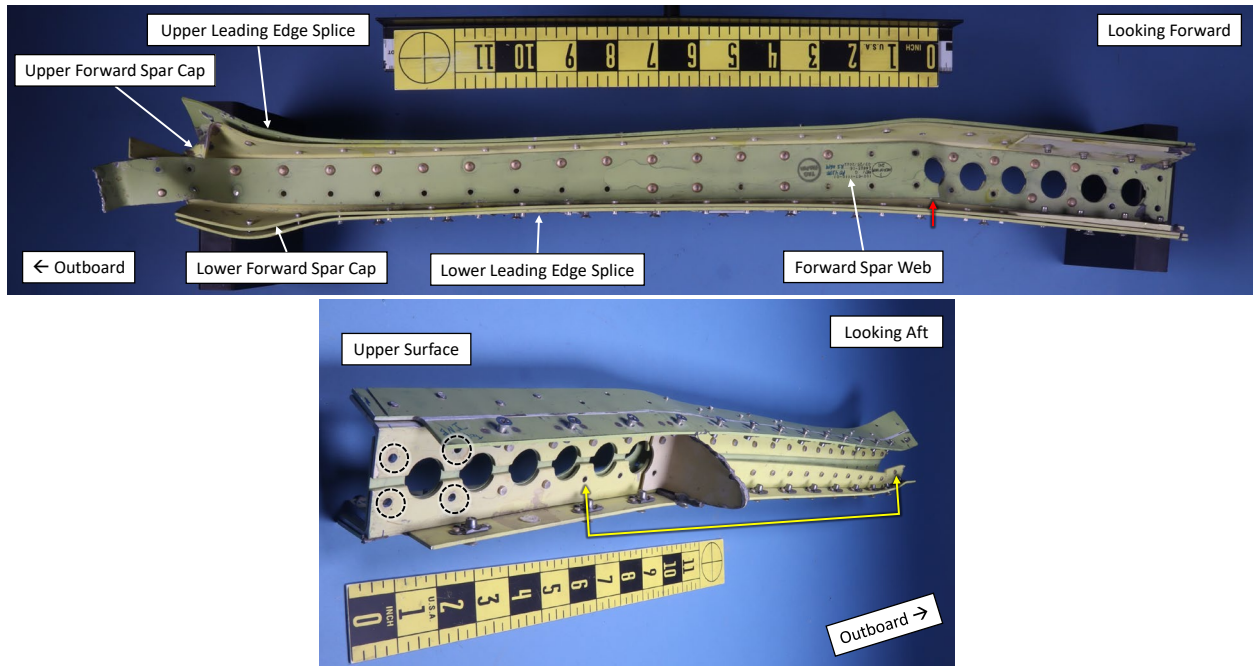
Photographs of the aft side (upper) and forward side (lower) of the wing extension forward spar and leading edge splice joints with the leading edge component removed. The red arrow in the upper image indicates a fracture on the lower side of the forward spar web where localized buckling of the web and upper cap/leading edge splice was observed. The lower image shows fastener separation of the outboard end of the lower forward spar cap from the web indicated by a yellow bracket. The circled locations indicated fasteners removed to aid with disassembly.
